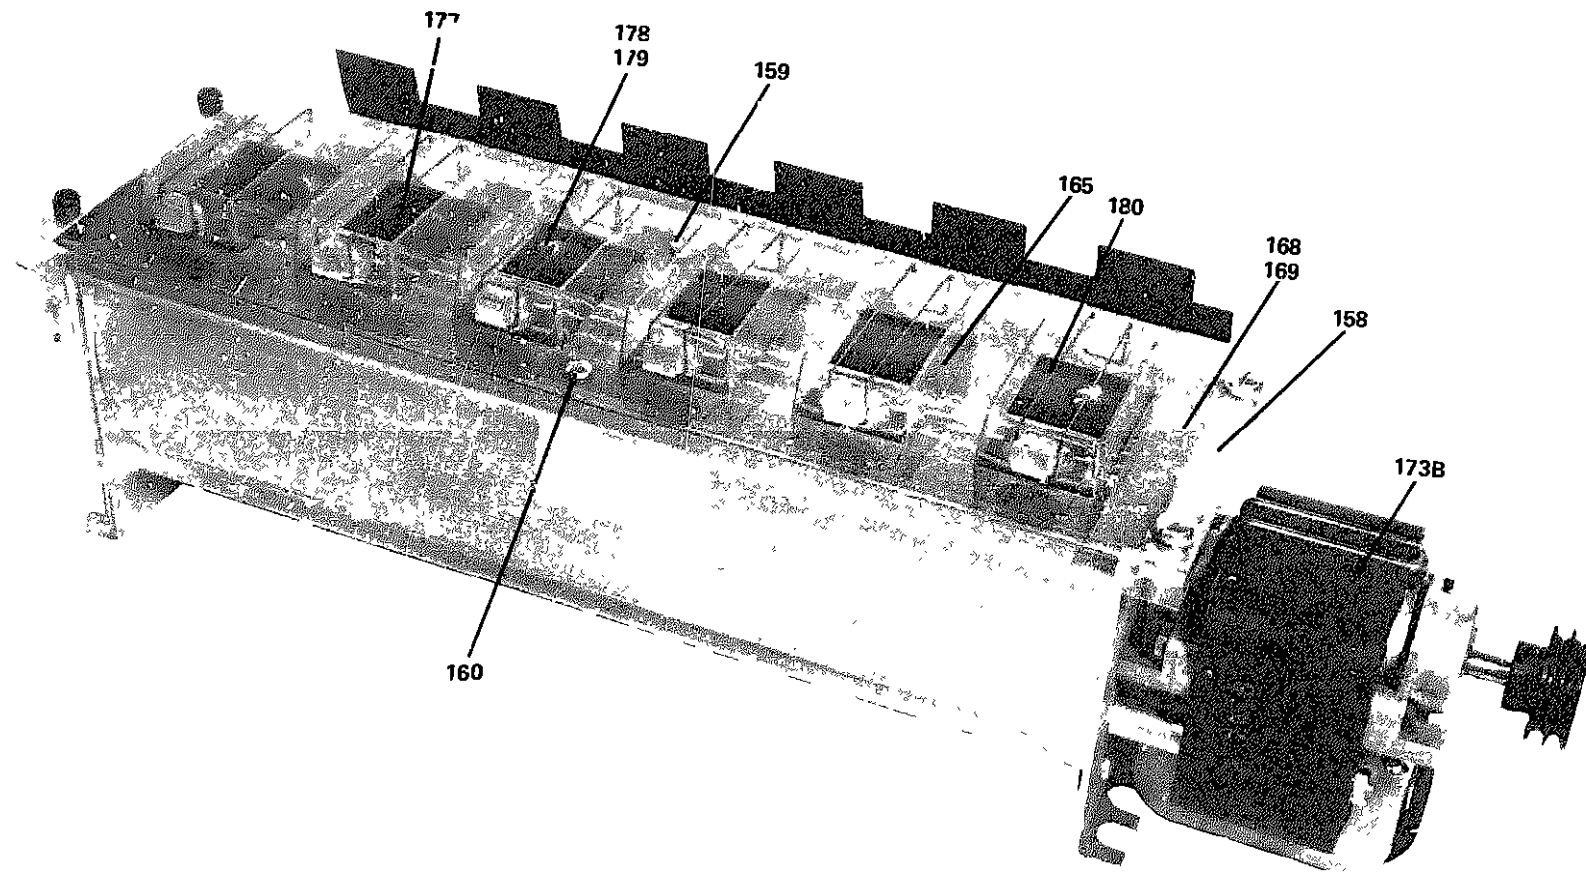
PAGE FEEDER VACUUM ASSEMBLY BOTTOM 1A5 (SHEET 7 OF 11)
